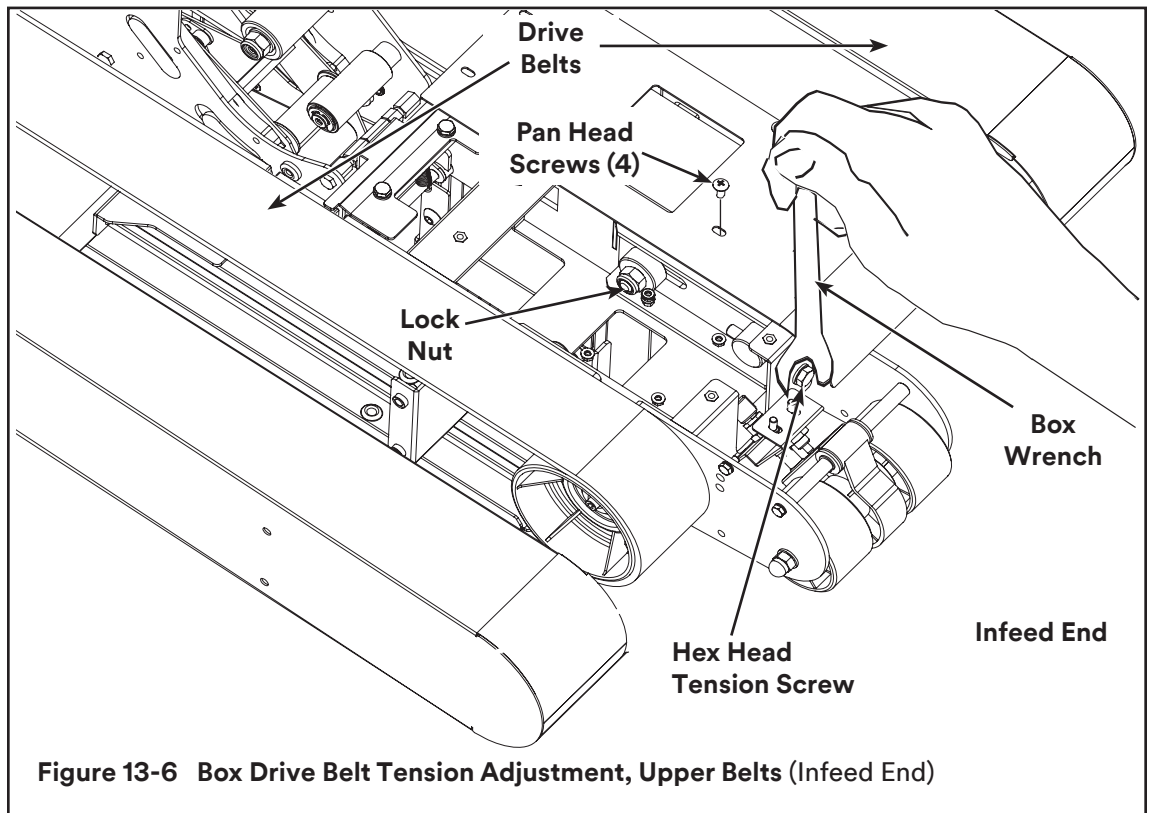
Box Drive Belt Tension Adjustment, Upper Belts (Infeed End)
